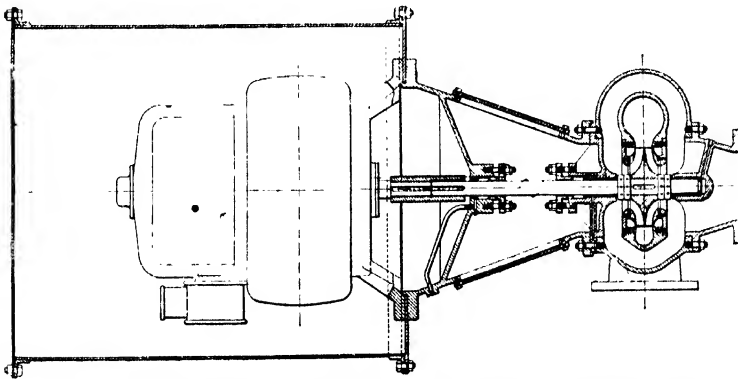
SECTION THROUGH THE MOTOR CASING AND PUMP OF A SUBMERSIBLE UNIT
